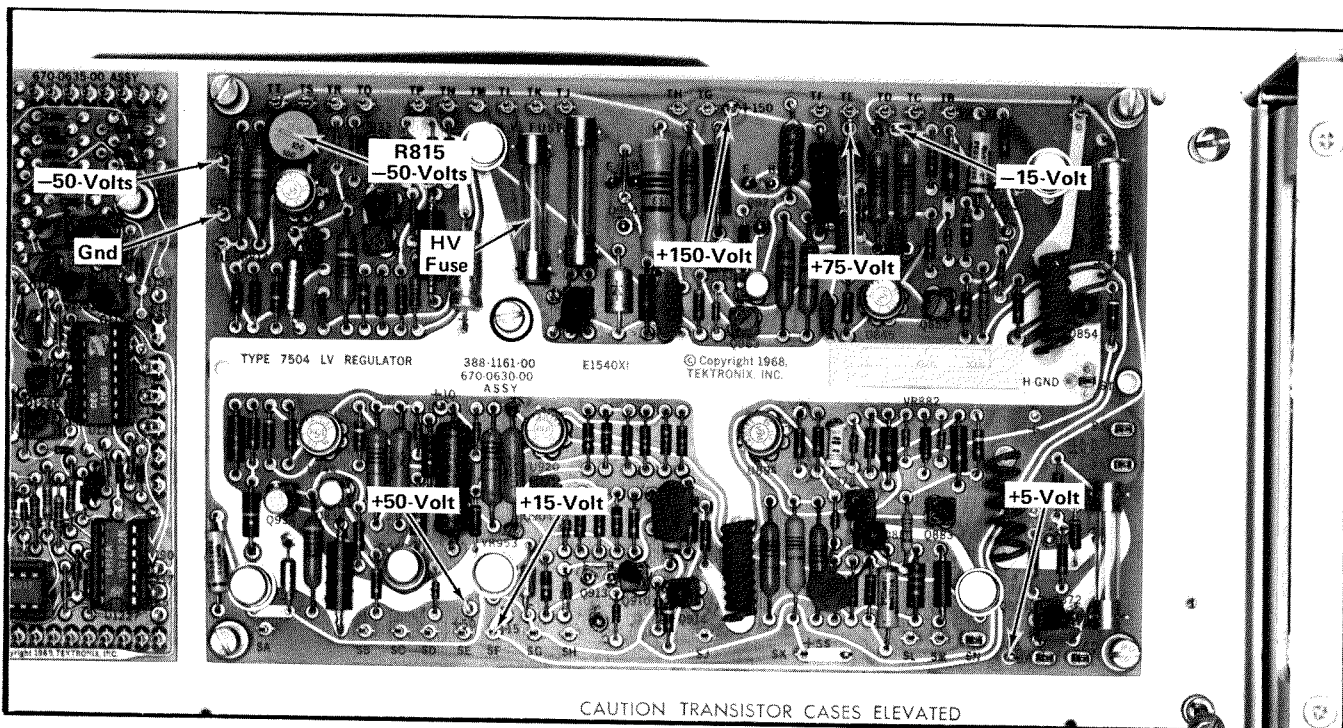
Location of power supply test points and -50-Volt adjustment (LV Regulator board).
